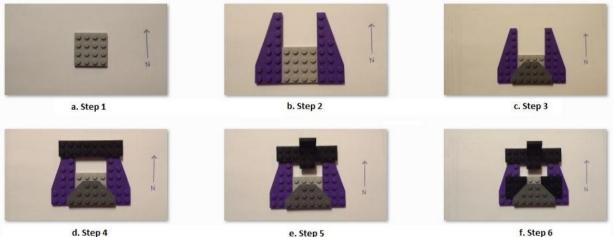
a-f - Scenario 1 - Visual Building Instructions
